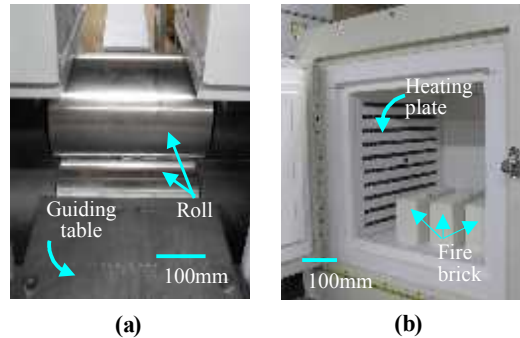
Pilot apparatus for hot plate rolling: (a) two high rolling mill (b) heating furnace
